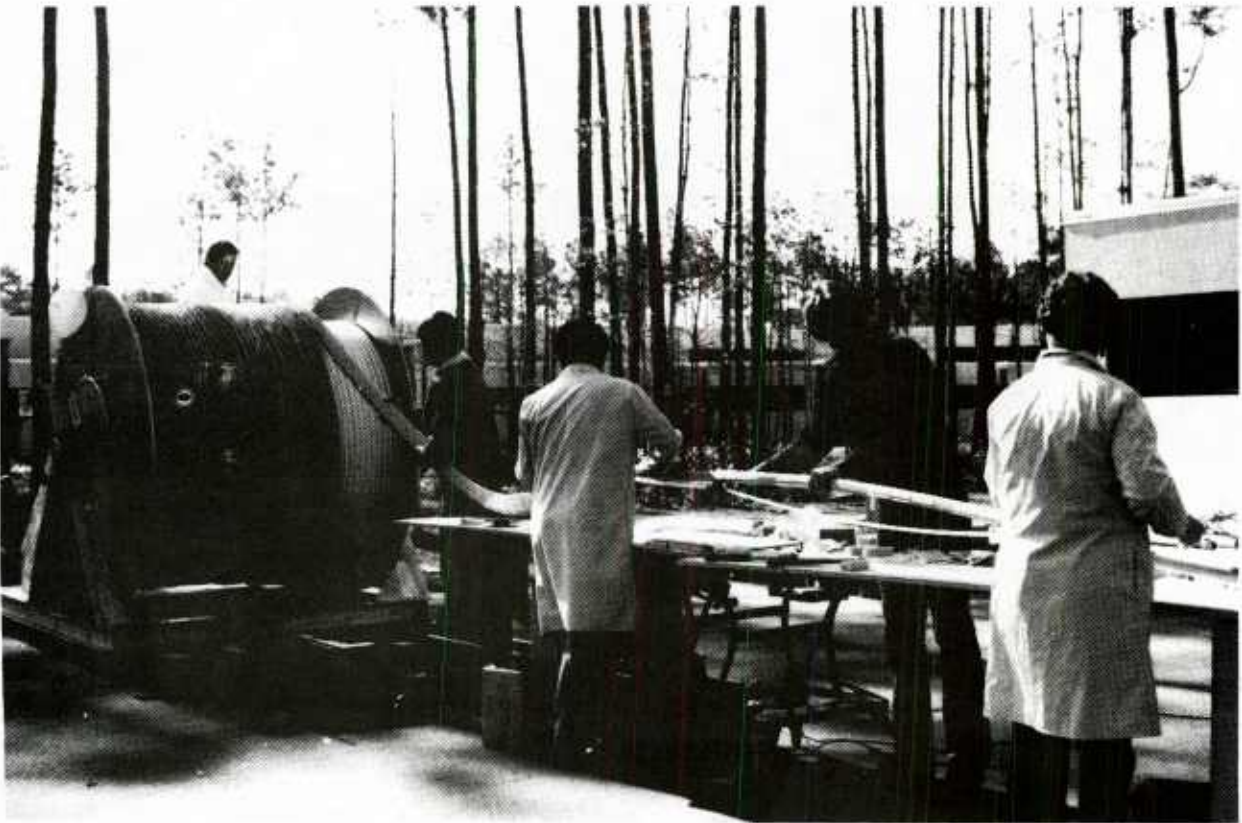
Temporary work station for installation of tow cable stops, fairing, and safety line before loading the finished cable on its winch.
